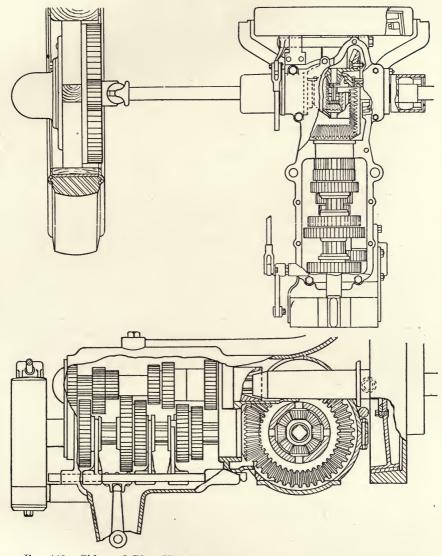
Side and Plan View of Walter Transmission and Front-Wheel Drive.
